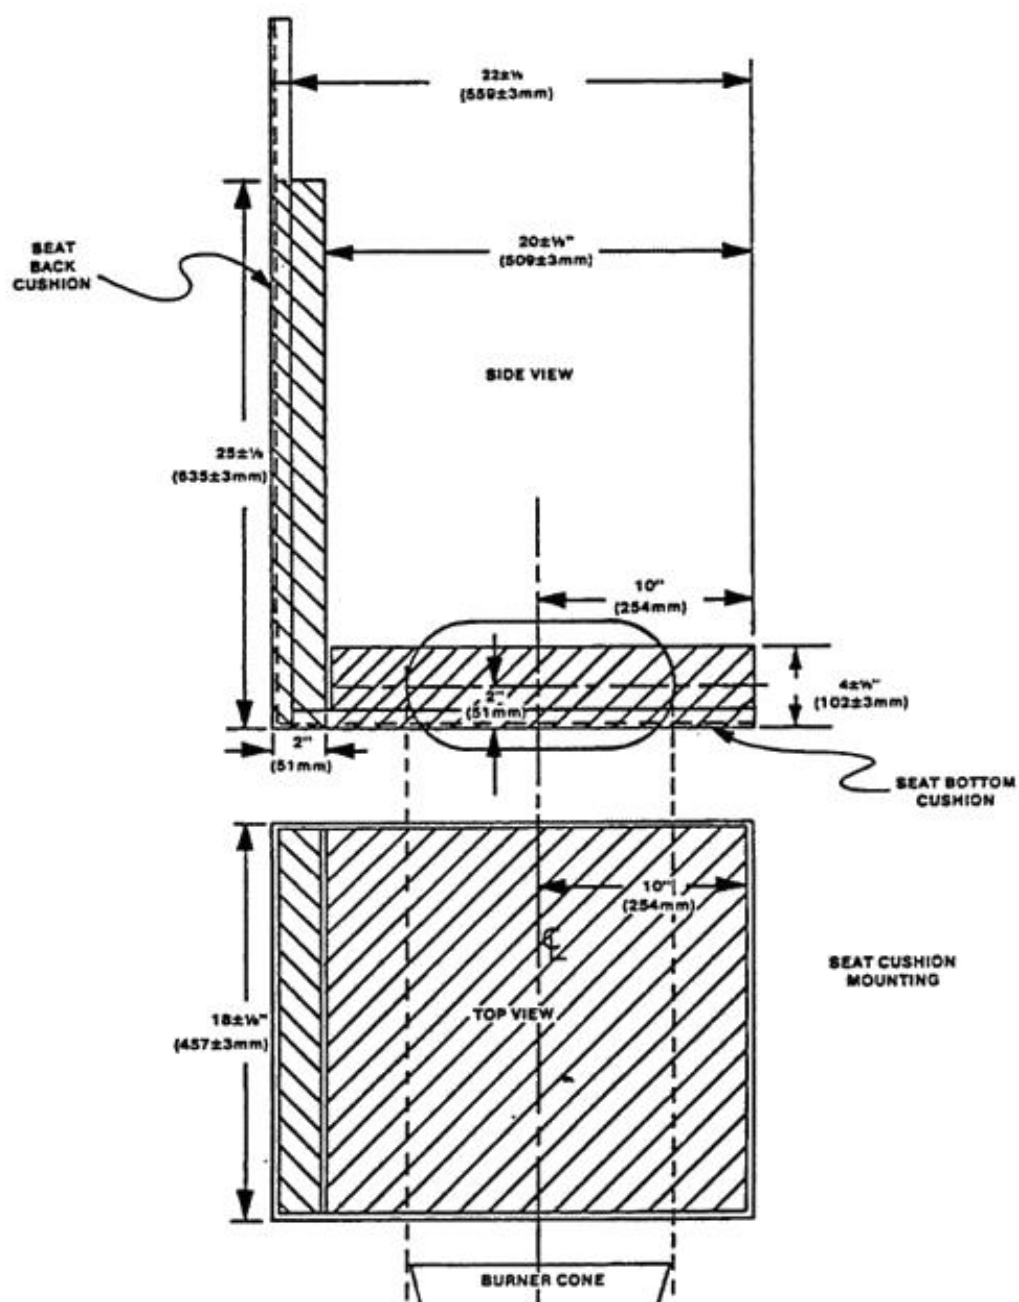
Dimensions of the FAR 25.853(c) seat frame
